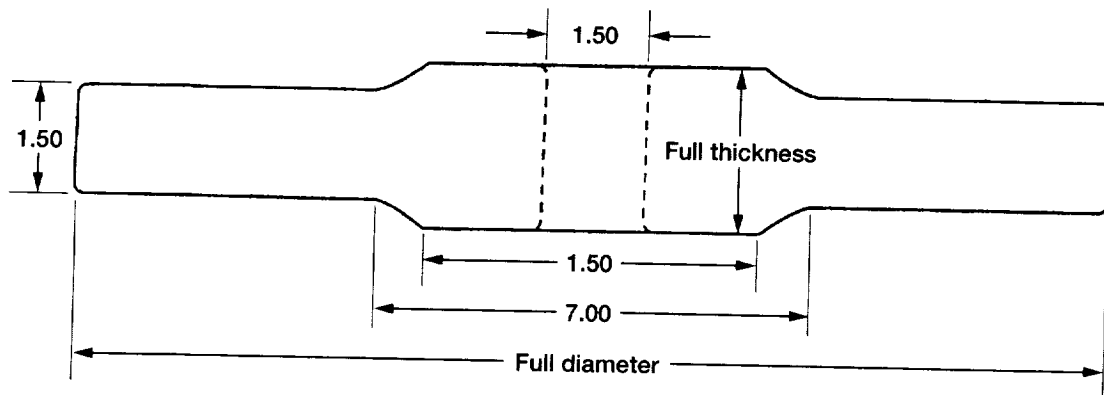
Machining plan for heat treat shape of Alloy 10 forgings.
